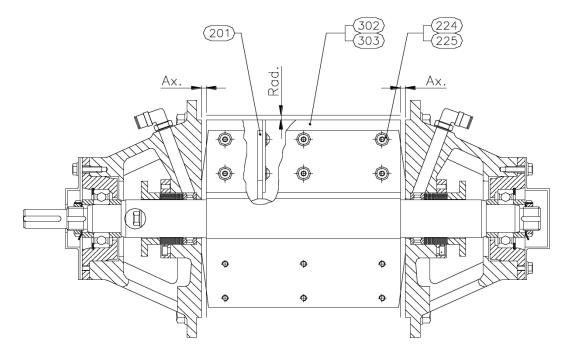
Adjustment for axial and radial clearance rotor blades
